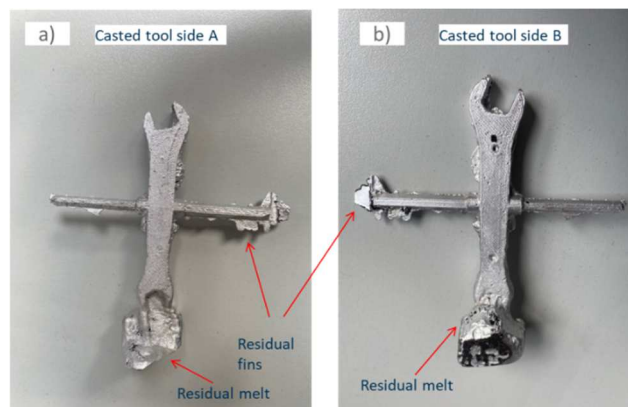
a) Top view of the as-casted multi-tool trial 1, b) bottom side of the as-casted multi-tool.
